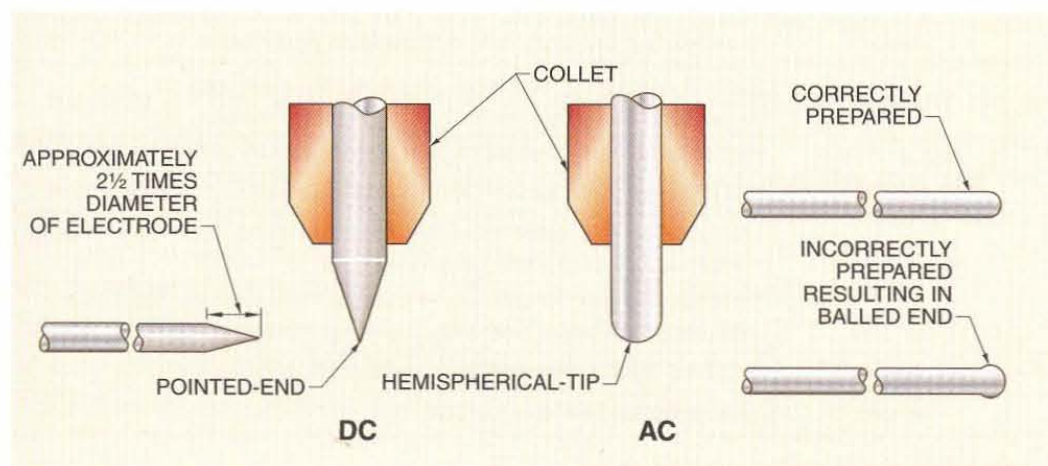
Welding with DC current requires an electrode with a pointed tip. Welding with AC current requires a hemispherical-tip electrode.
